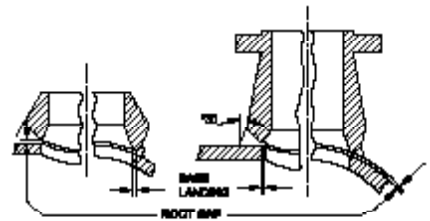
Flanged Butt Weld / Nipple Outlet
